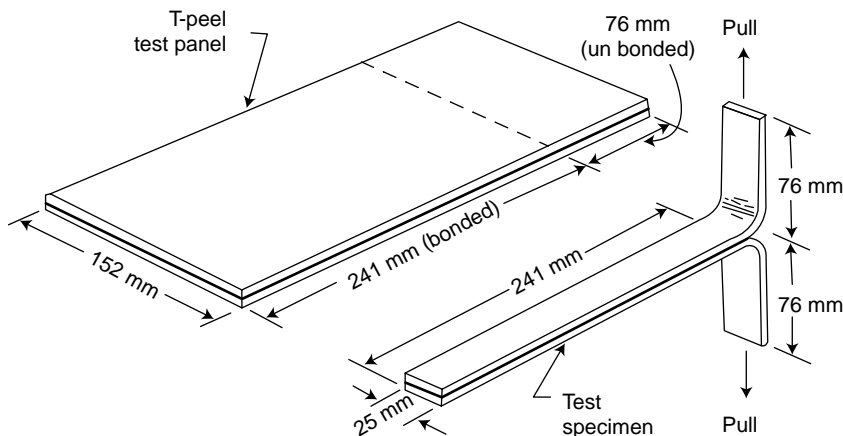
Test panel and T-type test (T-peel test) specimen for peel resistance of adhesives (standard test method: ASTM D1876-95). The bent, unbonded ends of test specimen are clamped in test grips of tensile testing machine and load applied at a constant head speed of 254 mm (10 in.). Average peeling load (in pounds per inch of specimen width) is determined for the first 127 mm (5 in.) of peeling after the initial peak.
